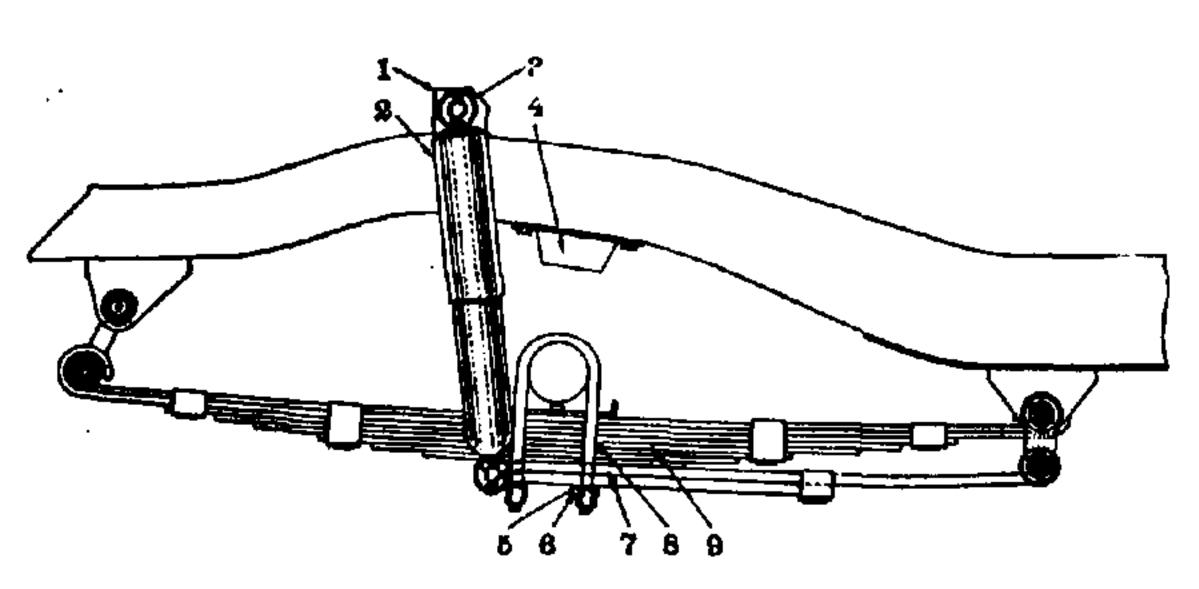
LEFT FRONT SPRING AND SHOCK ABSORBER
